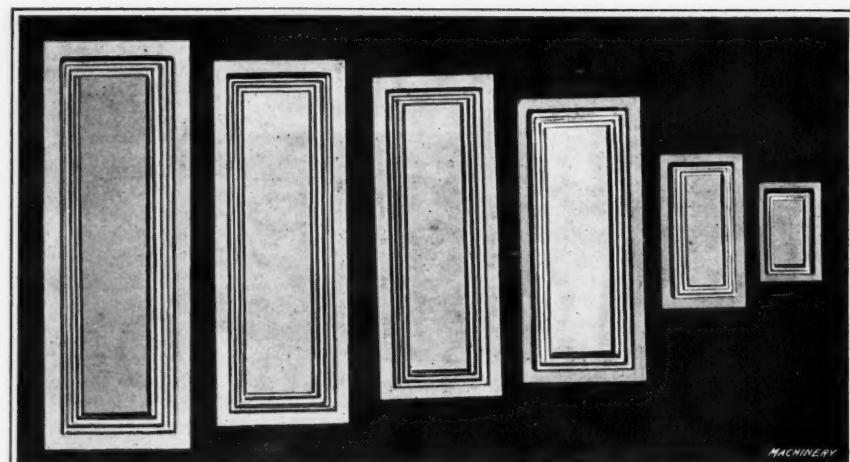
Series of Door Plates made in Dies cut on Reducing Machine by the Use of a Single Model
